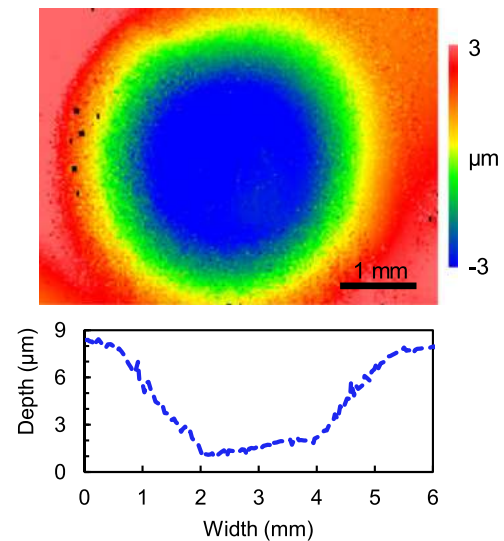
SWLI image and cross-sectional of the removal footprint in PCVM.
